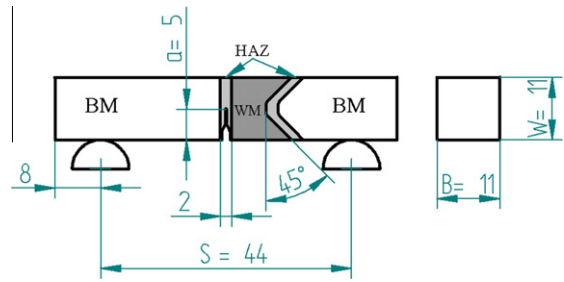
Geometry of SENB specimen with a pre-crack in HAZ.
